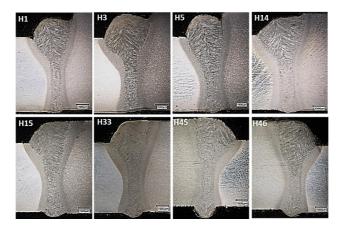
joints cross-section appearance according to welding parameters in the Table 5.
